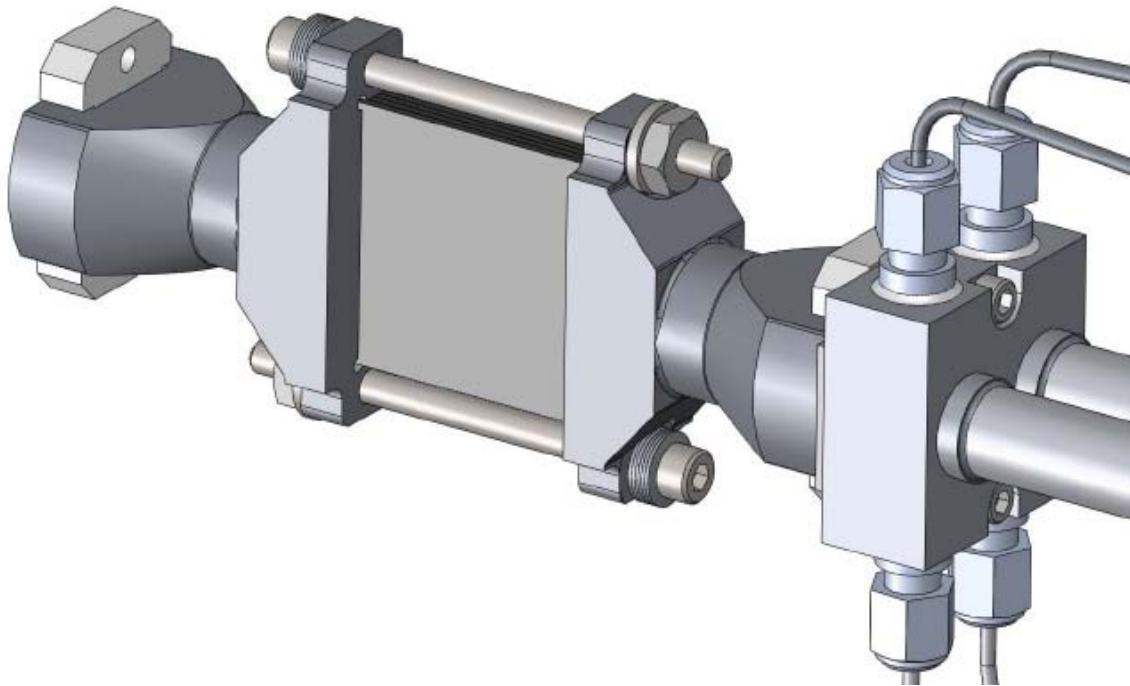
Drawing of the original tube adapter connected to the combustor. Two welded tubes transport mixed fuel / air stream and exhaust stream.
